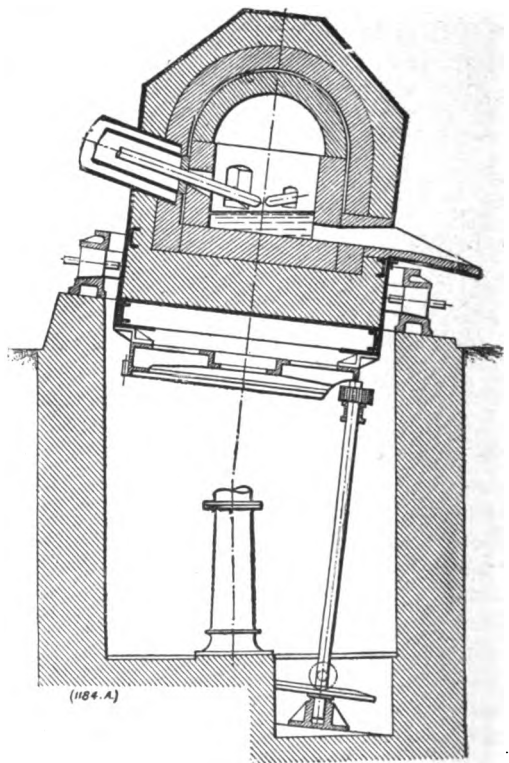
STASSANO ELECTRIC ARC FURNACE FOR STEEL MANUFACTURE.
